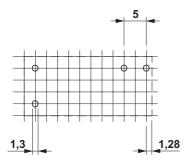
Perforations for assembly: View of the connections (2.5 mm basic grid dimension)
